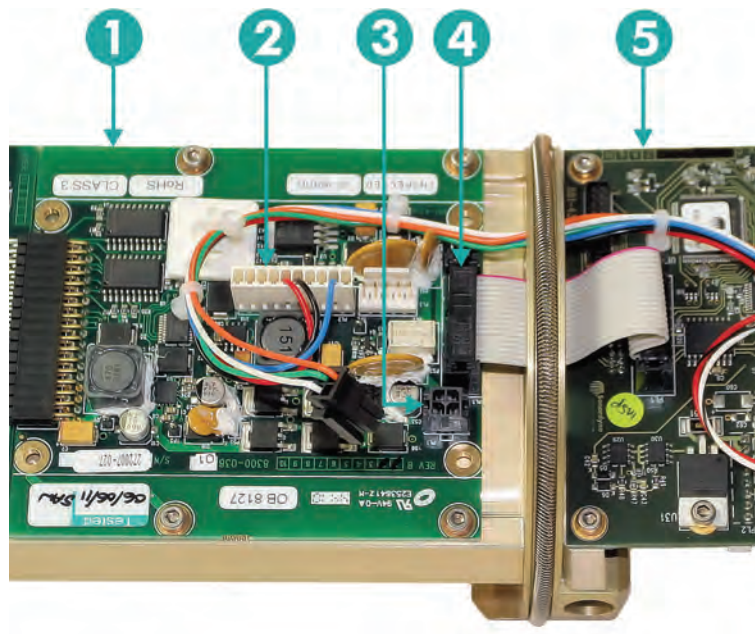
Securing the Sensor End-Cap to the Chassis
